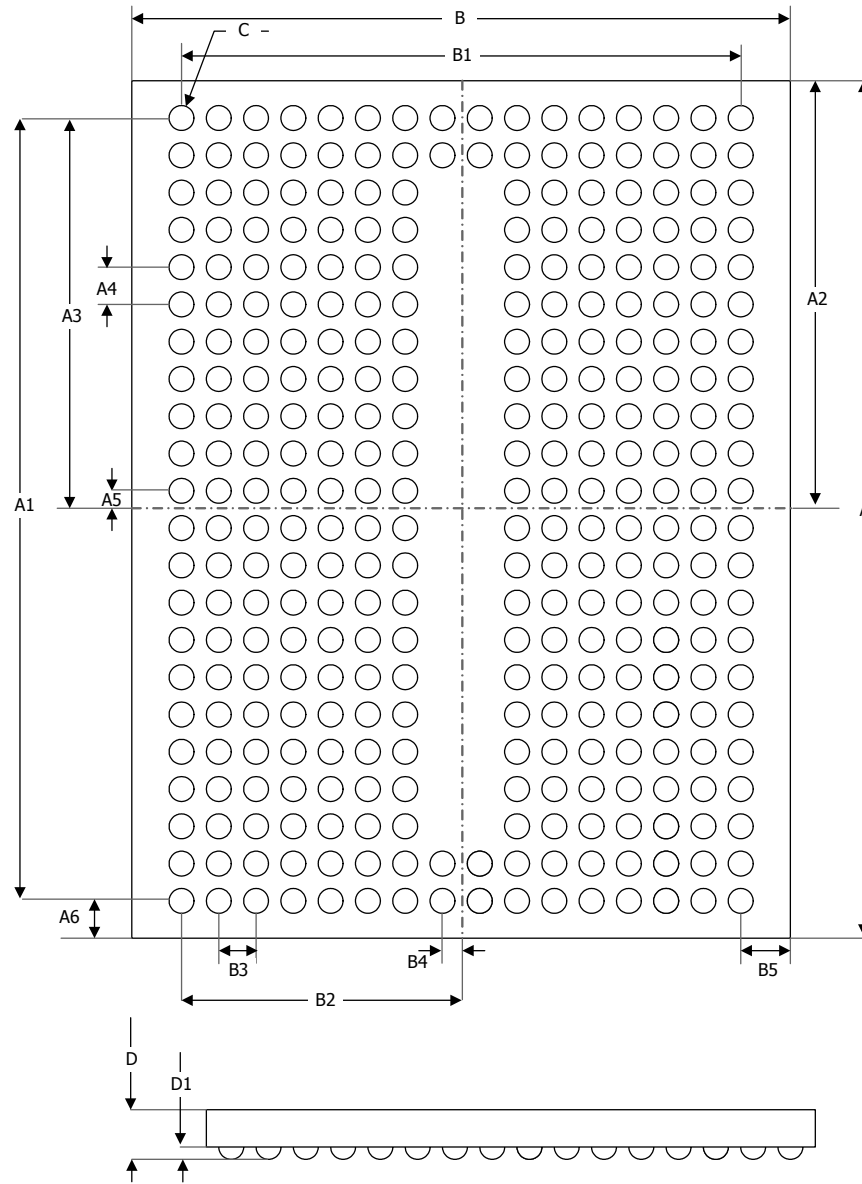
defines the ball spacing requirements for the 316-ball BGA package. The solder ball diameter is 0.55mm post reflow. The 316-ball BGA has one package size : 14mm x 18mm.
